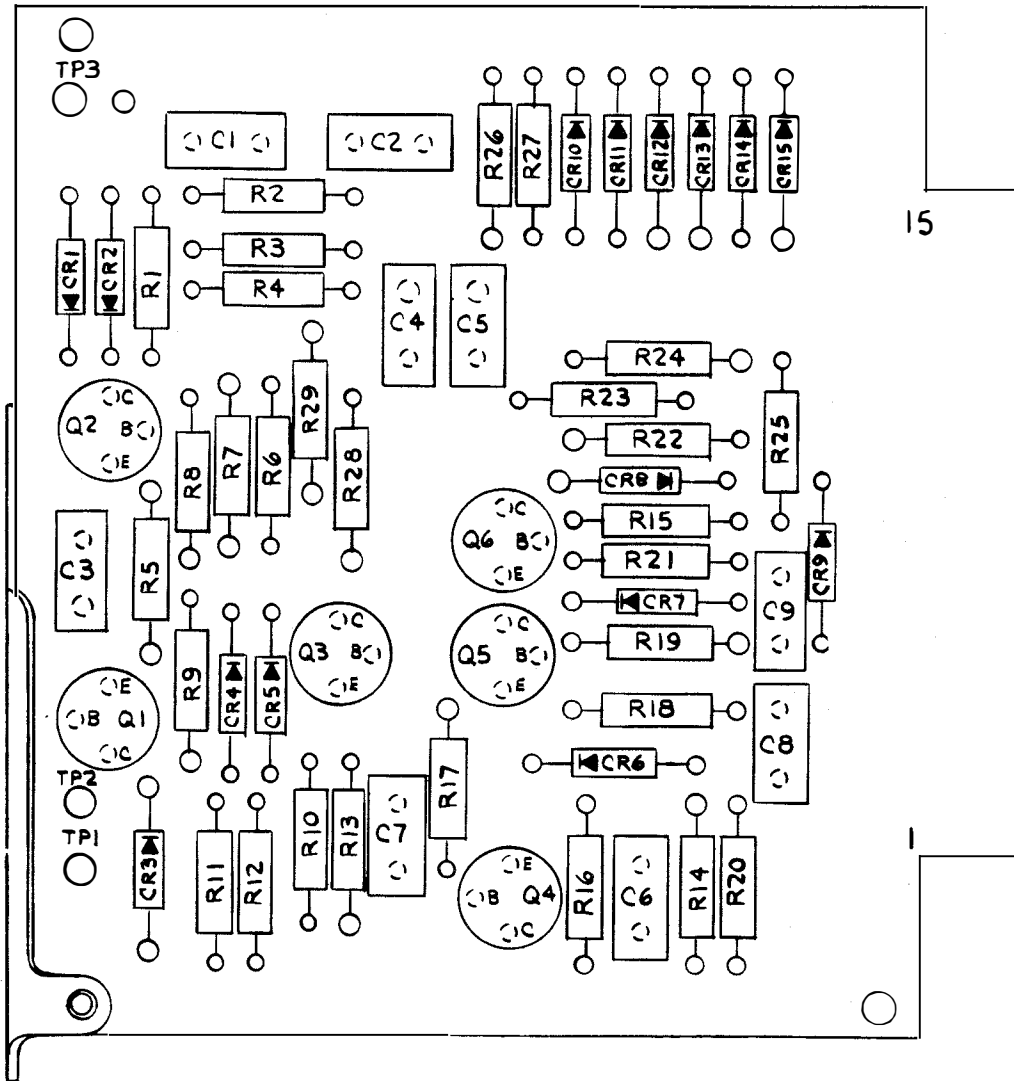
Printed Circuit Card A14 (80060080) Component Location Diagram
